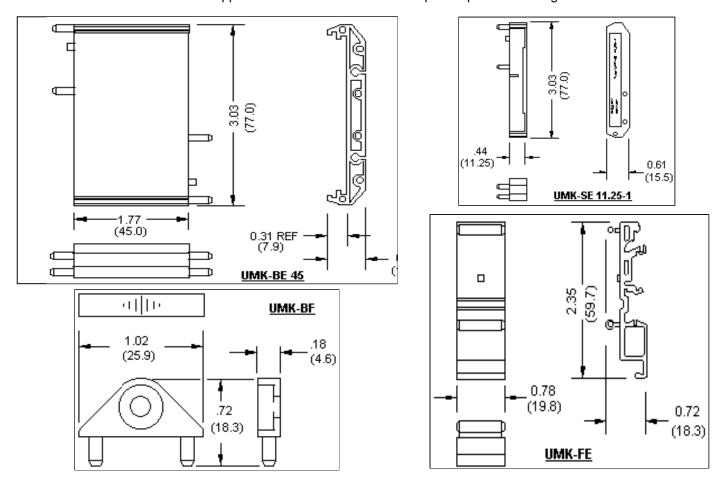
Digital Servo Axis Terminal Board Assembly Drawings
